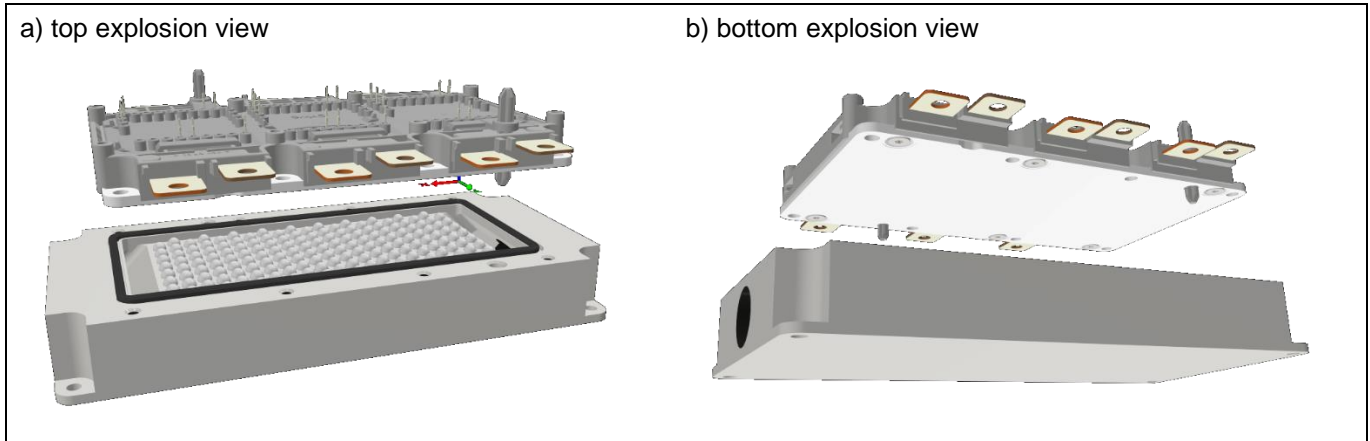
Explosion view of the sample cooler with standard sealing ring and HybridPACK Drive flat baseplate. The aluminum cooler has a simple “bubble” structure for appropriate direct fluid cooling of the flat baseplate.
